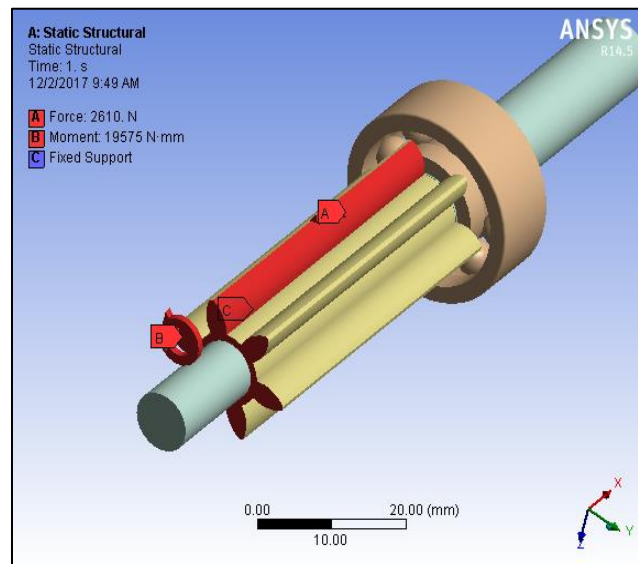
Fixed and forced Condition of Shaft and Pinion Gear Assembly
